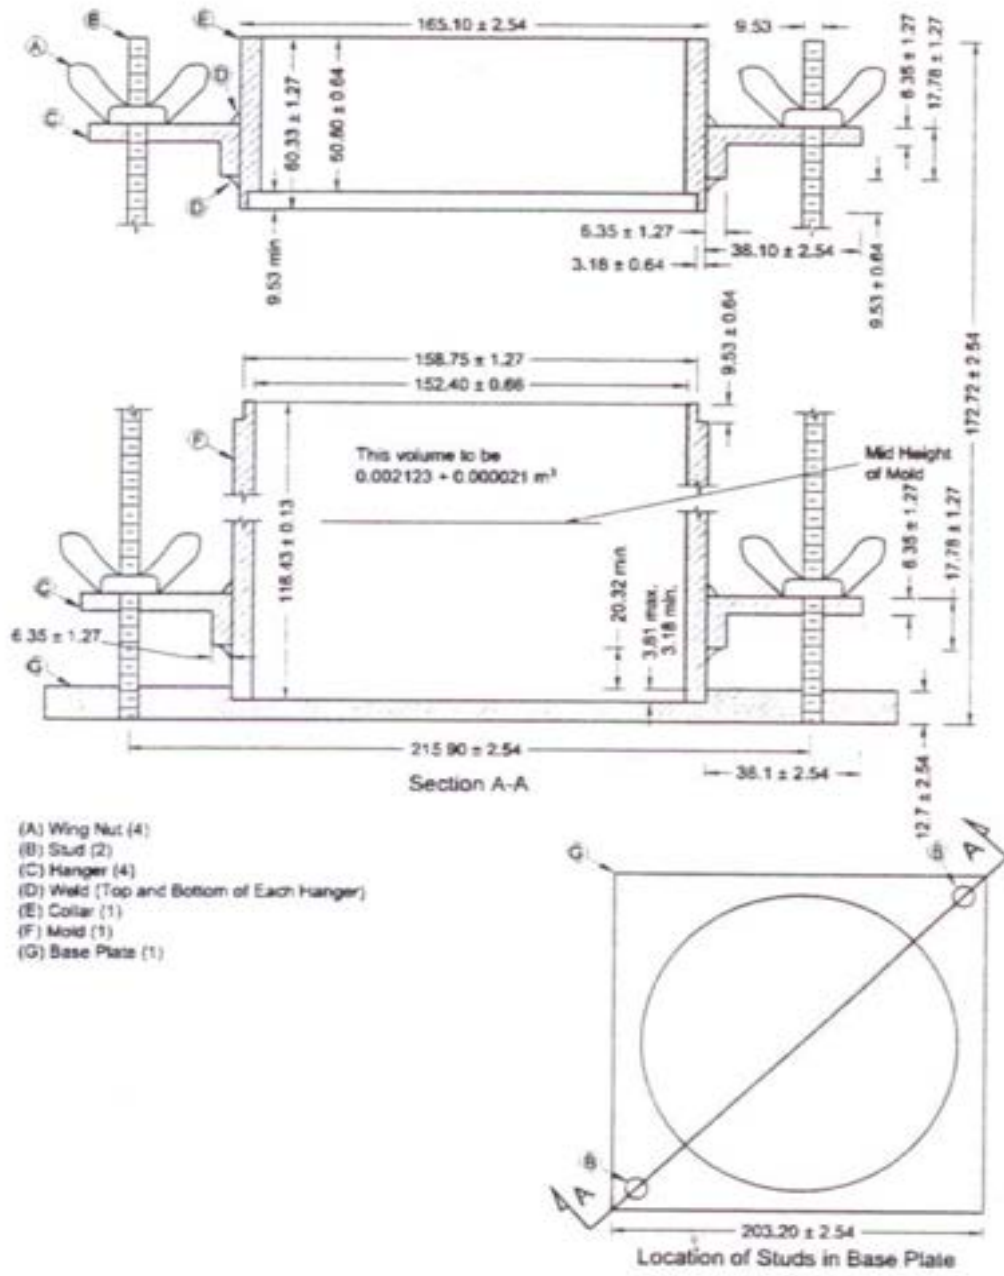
Cylindrical Mold and Base Plate (101.60-mm Mold)
